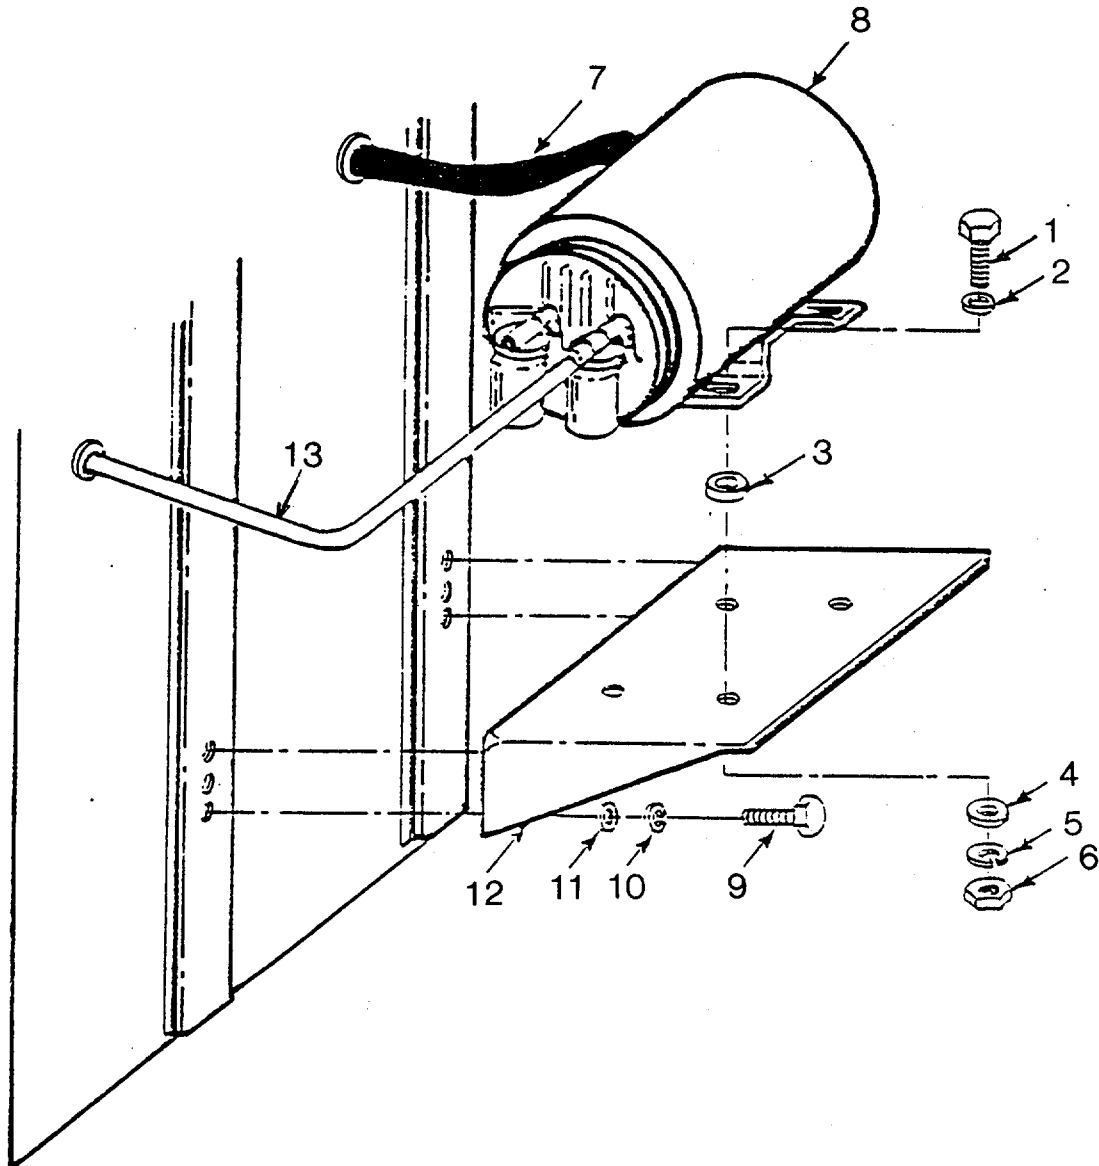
Vertical Vacuum Frame Assembly Pump
